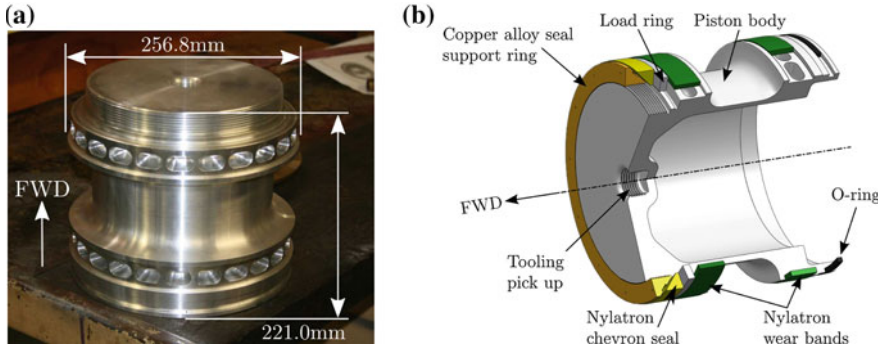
X2’s lightweight 10.5 kg piston. a Piston body, machined from 7075-T6. b Cutaway view of piston assembly. Adapted from Gildfind et al. [41]
